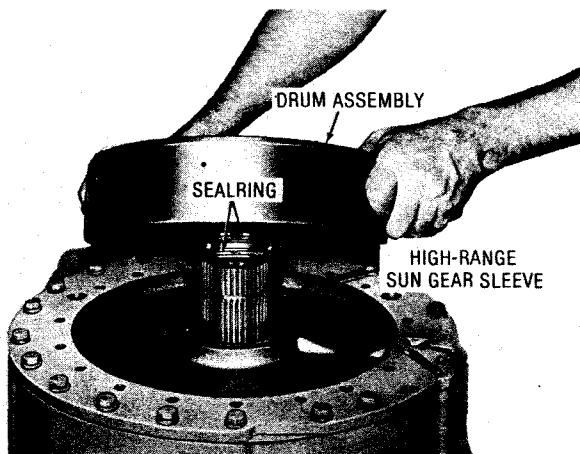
Removing low-range clutch drum assembly (TRT 2221-1, 2421-1)
